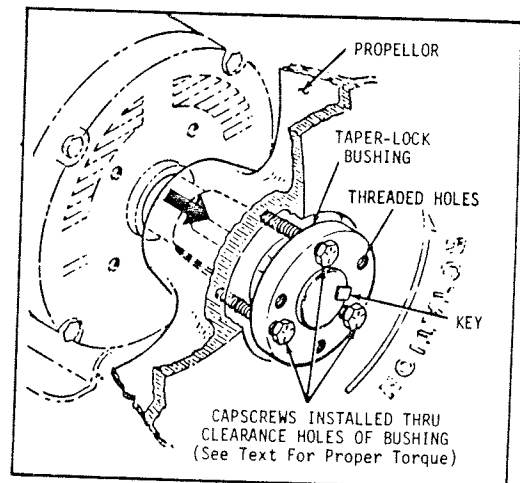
CAPSCREW ARRANGEMENT FOR REASSEMBLY
